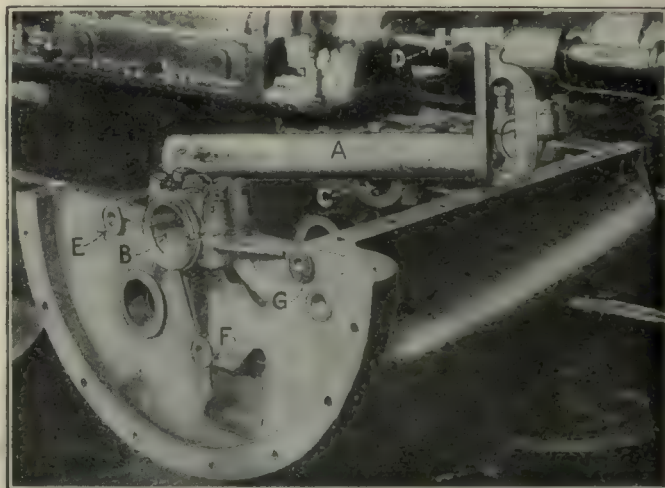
TESTING THE MAGNET-COIL SUPPORTS
